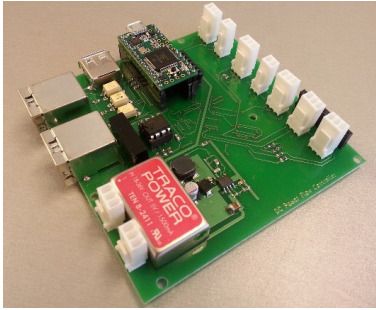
DC power flow emulator controller PCB and enclosure.
